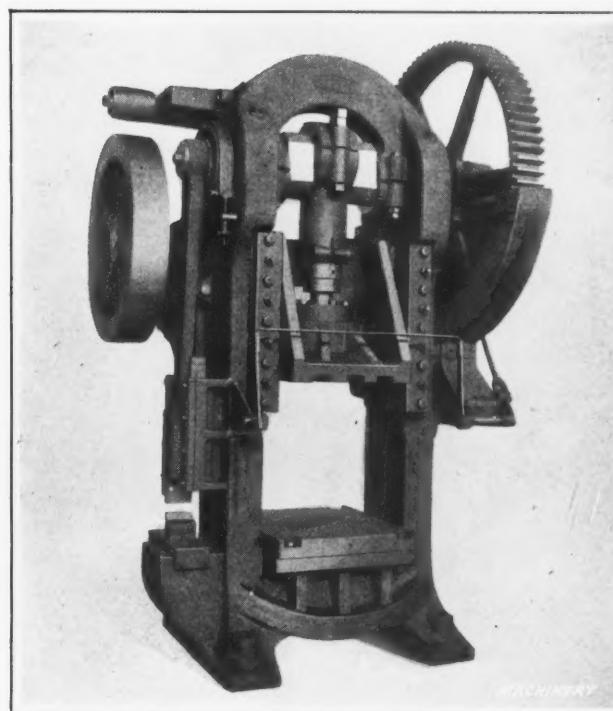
Trimming Press which is Typical of a Line built by the Massillon Foundry & Machine Co.
